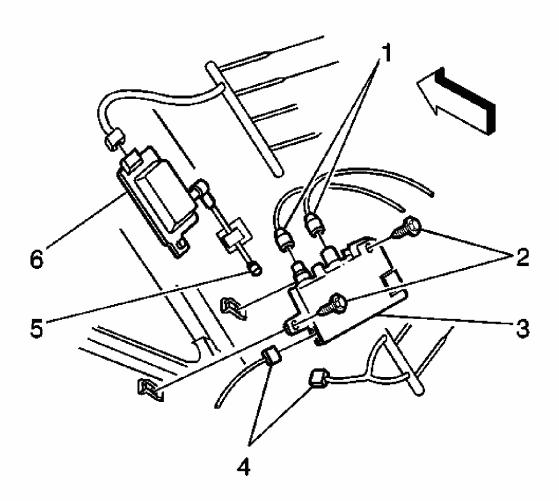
View Of TV Antenna Module & Components Courtesy of GENERAL MOTORS CORP.
